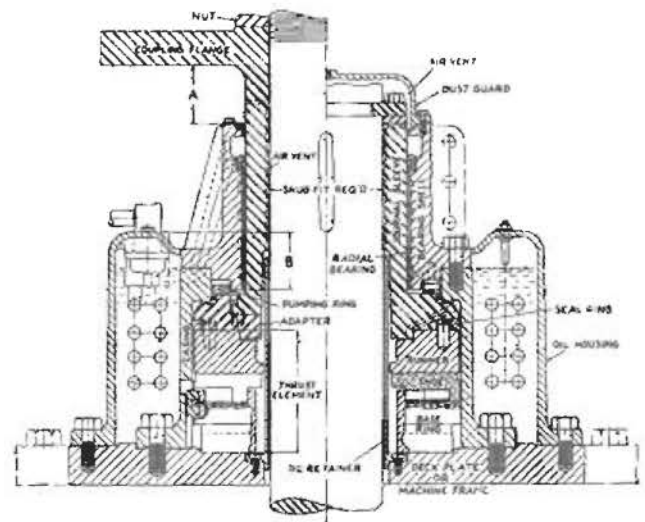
Combined thrust and radial bearing, Style VM. The radial bearing, above the thrust, is automatically lubricated at all speeds. Water cooling is used for high speed. Right half shows a closed top; left half shows a coupling flange. Thrust elements used are Style NV or JV. STANDARDIZED: See Bulletin M.
